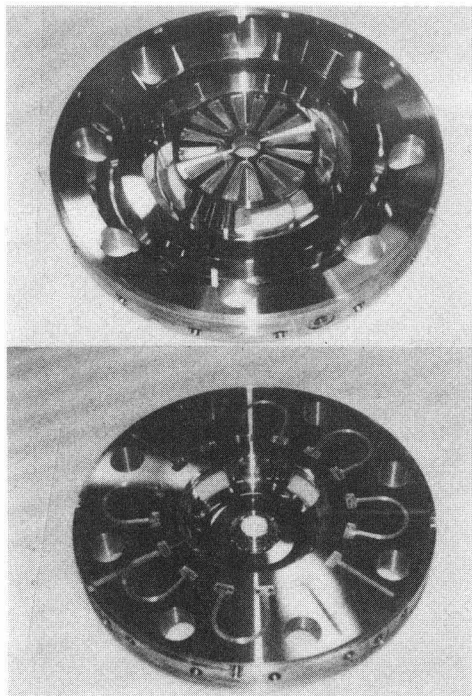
ACS half-cell showing both sides of the final machined cavity.
